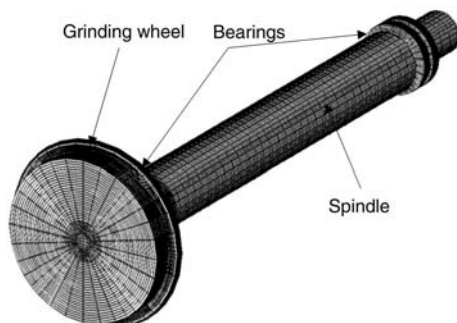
Selective model of spindle and grinding wheel based on [11, 23]
